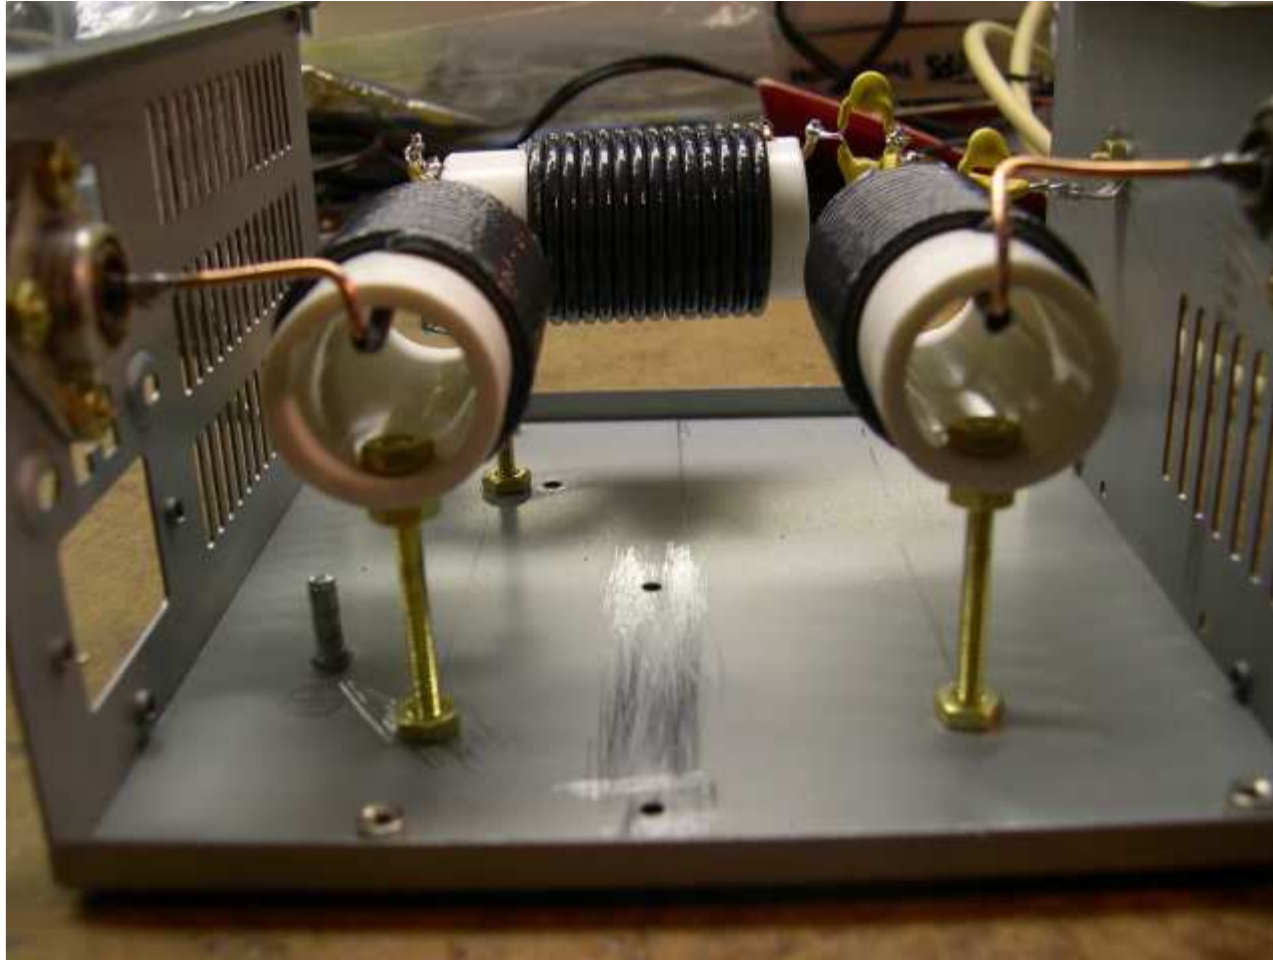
Connector end showing coil mounting detail. [[high resolution version](#)]
